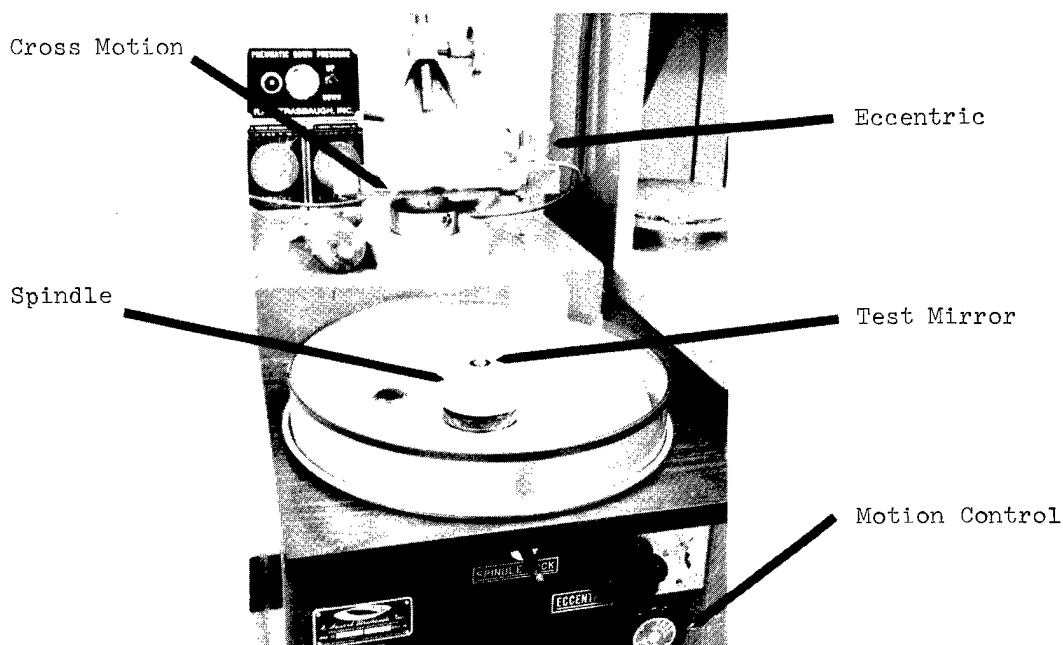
Polishing Machine Showing Principal Components With Test Mirror Under Fabrication†
